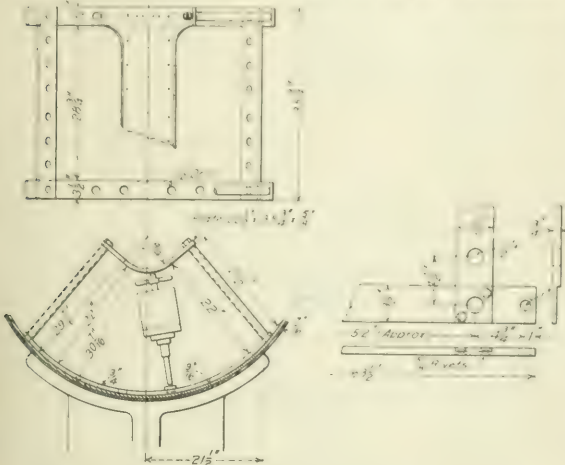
Jig for Boring Cylinder Saddle Bolt Holes.
